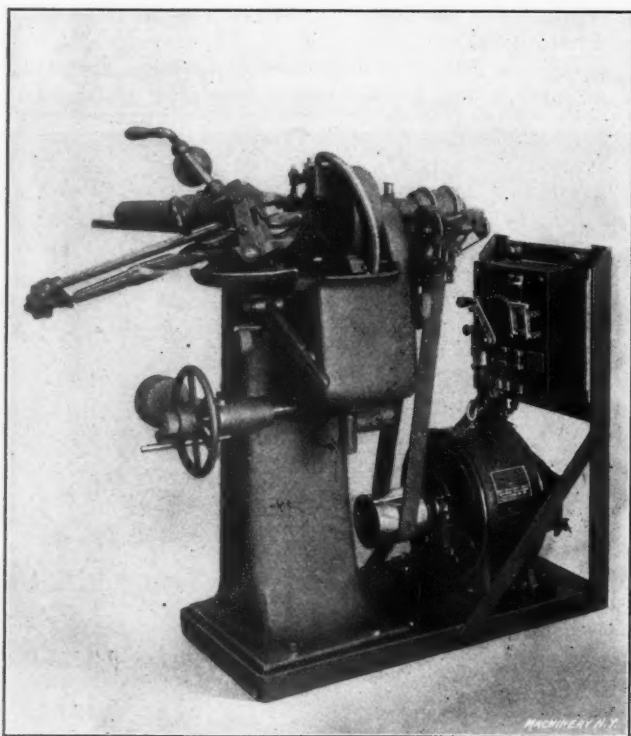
Drill Grinder with Specially-constructed Support for Starter
